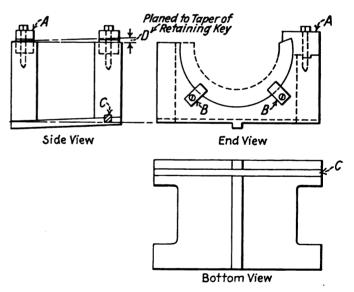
Chuck for Holding the Markle Removable Crown Brasses
